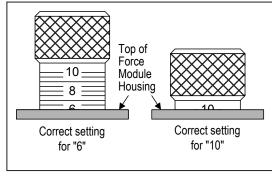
Proper Adjustments of Weld Force Adjustment Knobs
